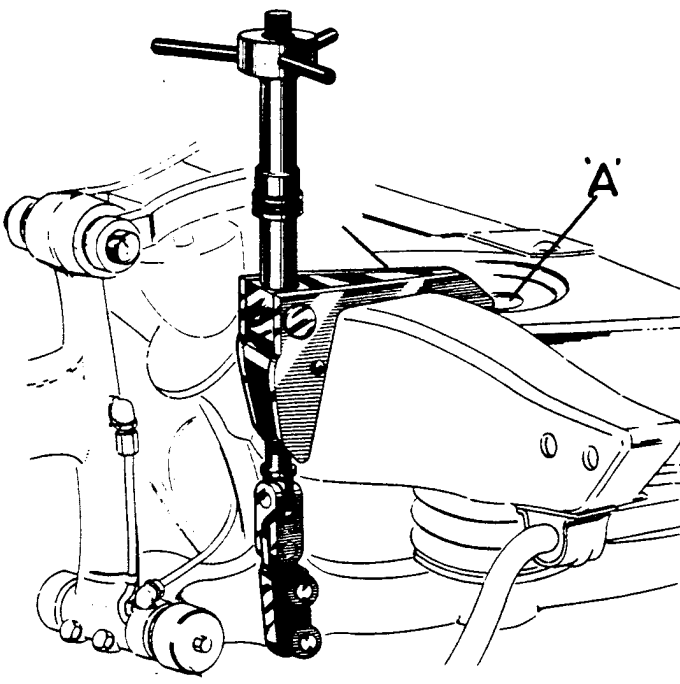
SPRING COMPRESSING TOOL IN POSITION.
